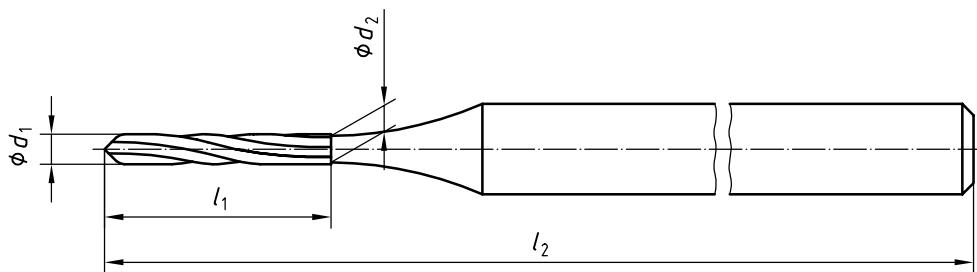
Torpedo, cylindrical, head length 6 mm, carbide finishing burs
